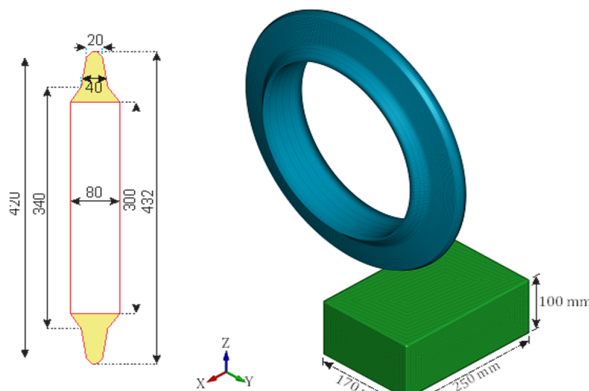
Geometry and mesh of a rock sample with a real-size disc cutter (dimensions in mm).
